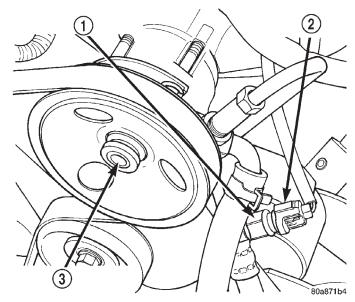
Power Steering Pump Pressure Switch—2.5L Engine
